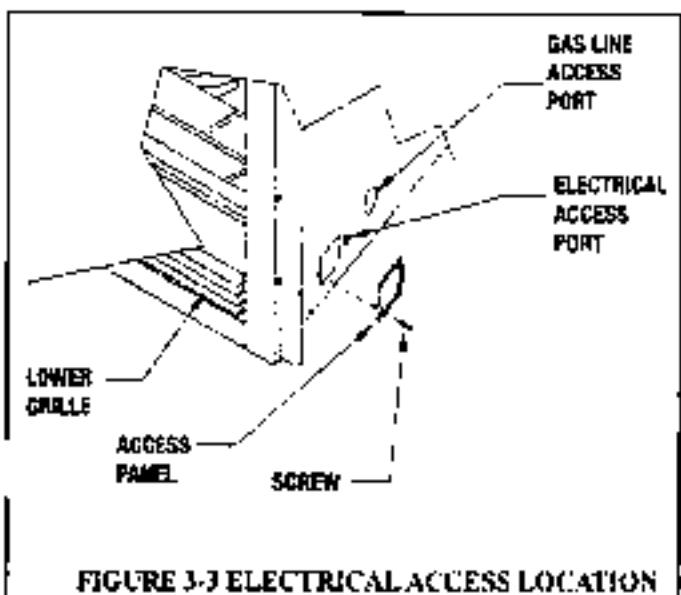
ELECTRICAL ACCESS LOCATION
